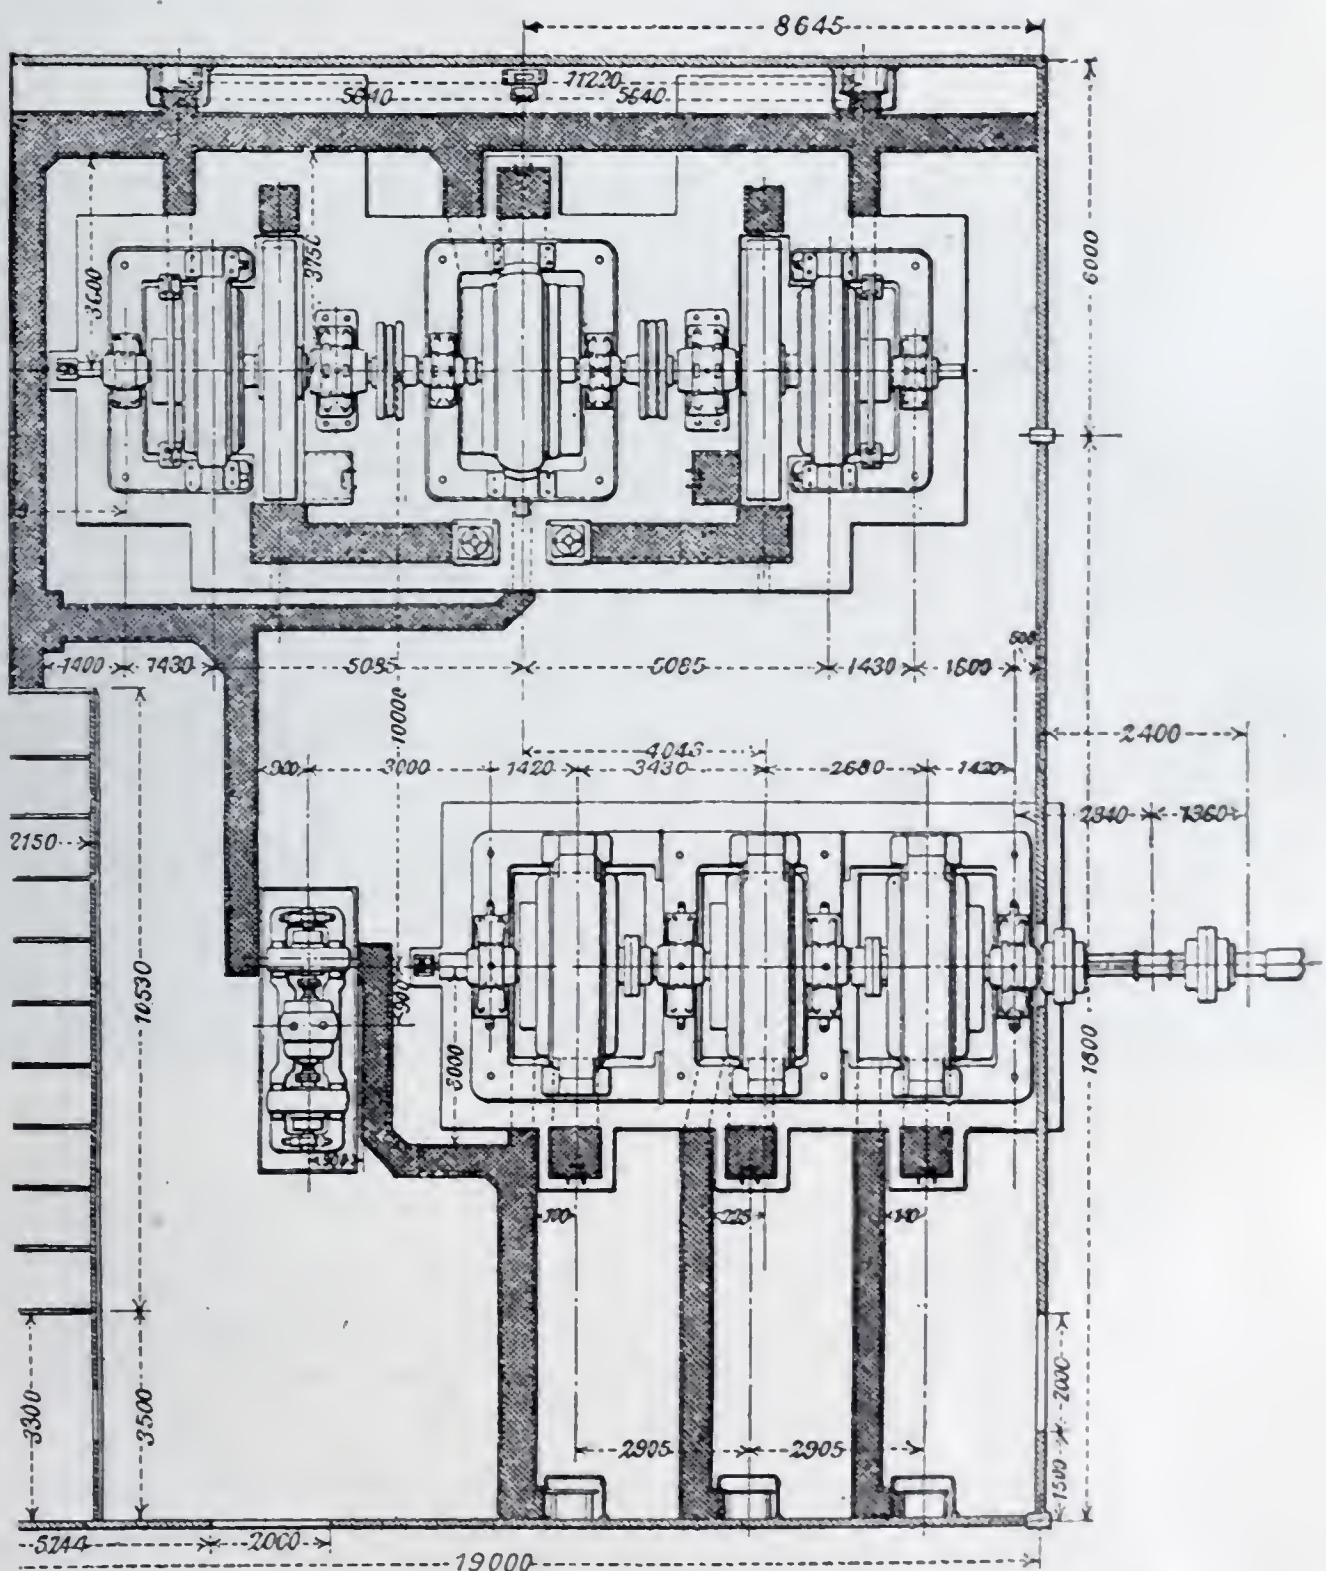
General Arrangement of Equalizer Set for Reversing Mills.
